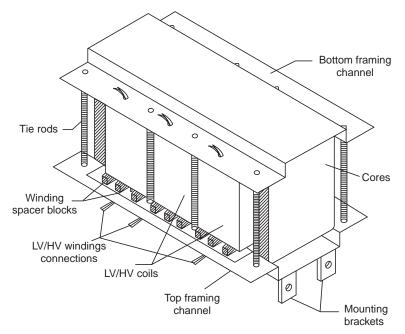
AMDT core/coil assembly (core joint on top)
